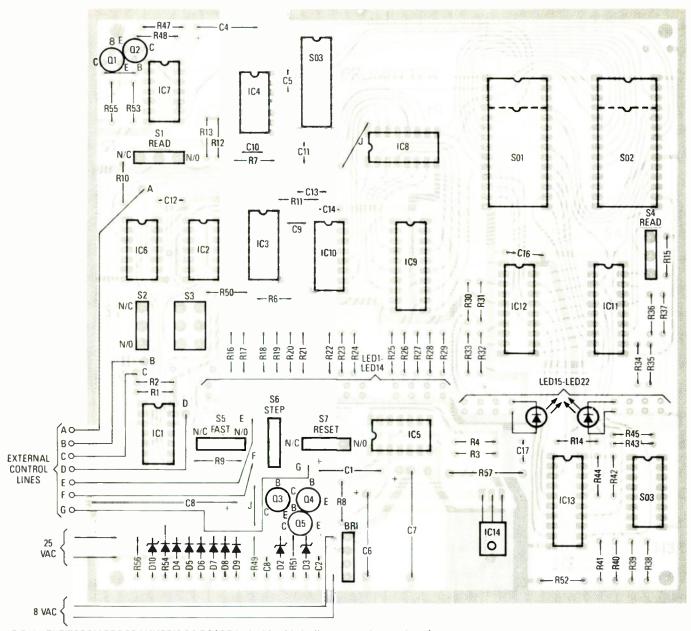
THE EPROM PROGRAMMER'S PC BOARD is double-sided; all components mount as shown here. Since a home-made board's holes are not plated through, the IC sockets must be mounted slightly above the board so that the socket pins can be soldered to the top side of the board.
